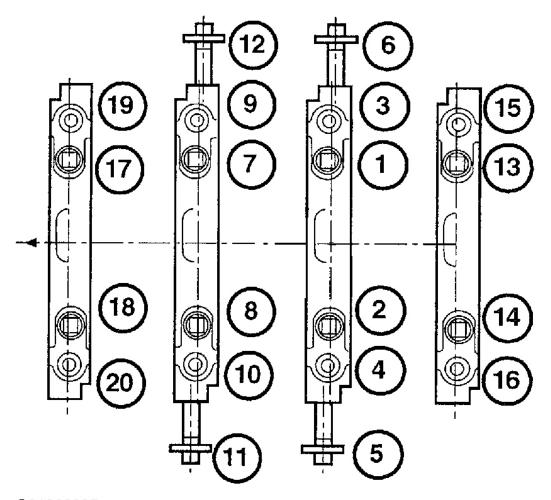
Installing Crankshaft & Main Bearing Courtesy of DAIMLERCHRYSLER CORP.
